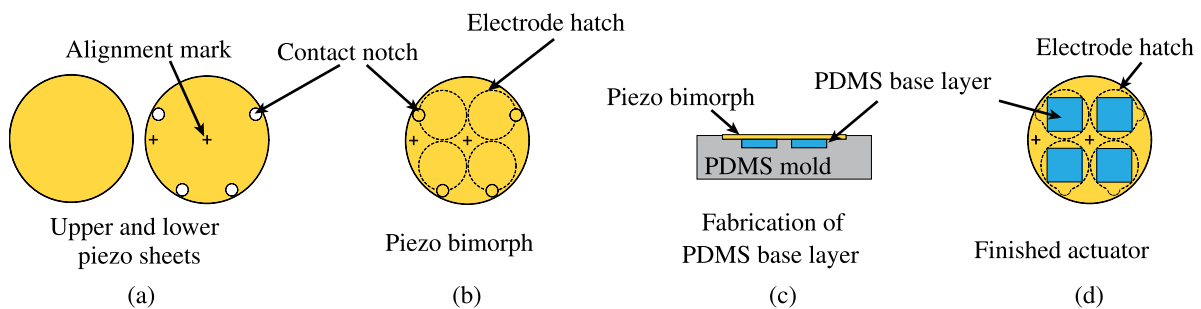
Fabrication of the actuator from two separate piezo sheets (a) glued together to form a bimorph (b). (c) Fabrication of the PDMS base layer using a negative mold. (d) Finished actuator with base layer ready for assembly.
